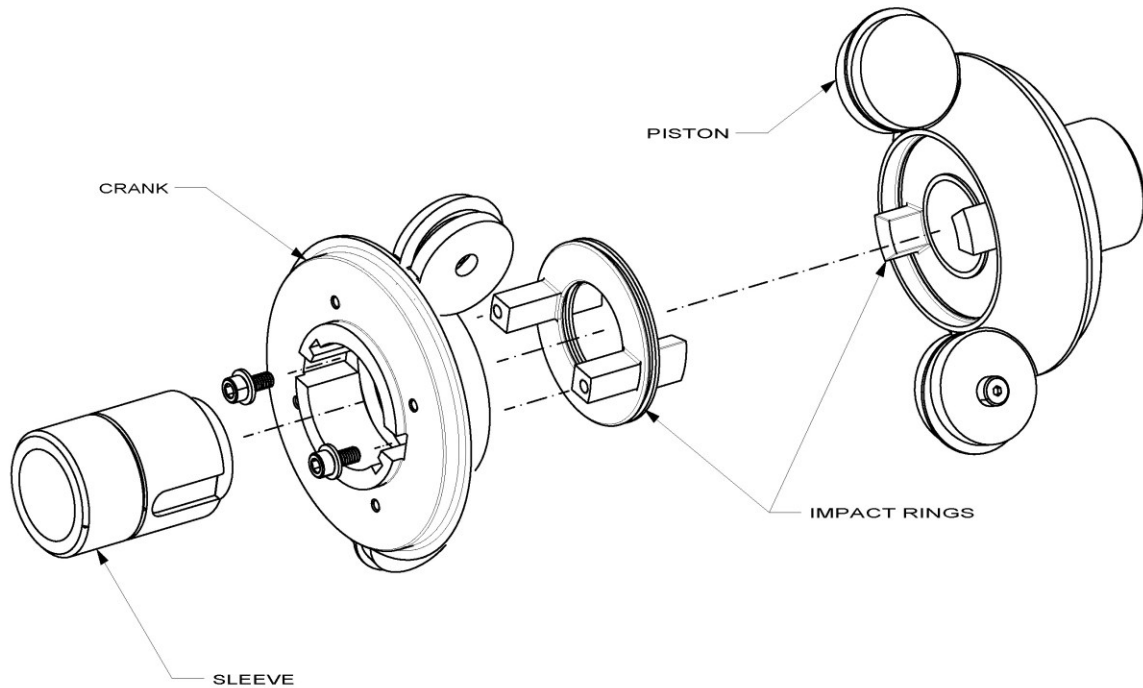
Improved impact ring and rotor assembly including integral keys in impact ring.
